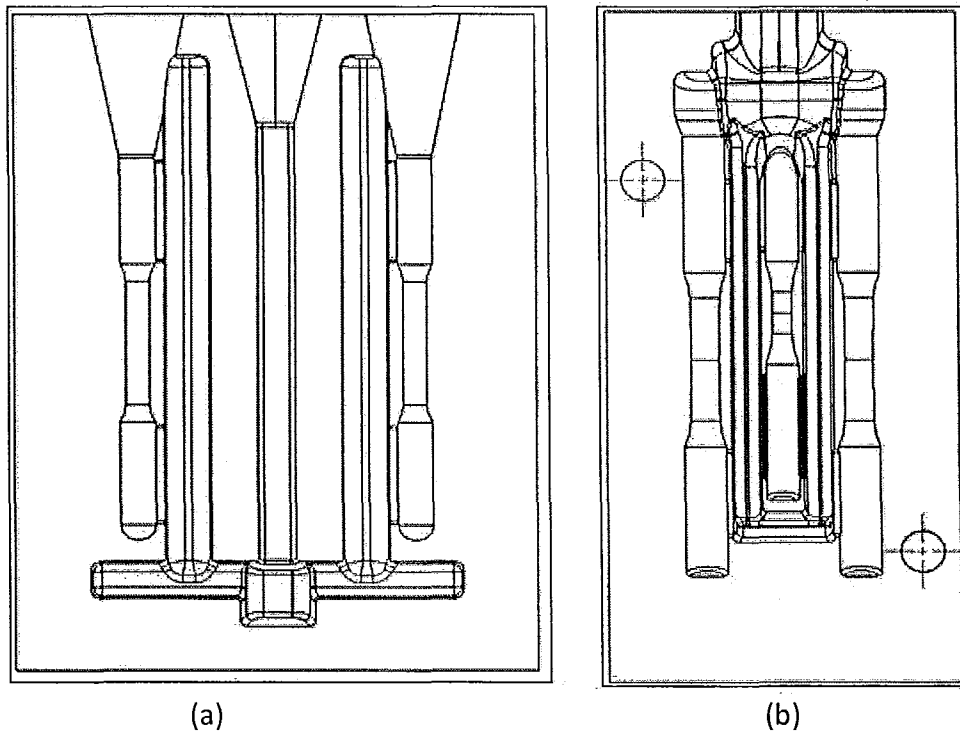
Die Cast Mould a) gravity casting Standard ASTM B108/B 108M-08 and (b) newly designed mould for tilt-pour casting.
